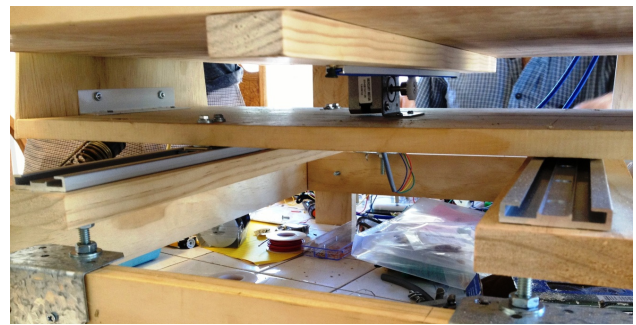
The gears and sliders located under the board that allow the A frame to move unimpeded.
